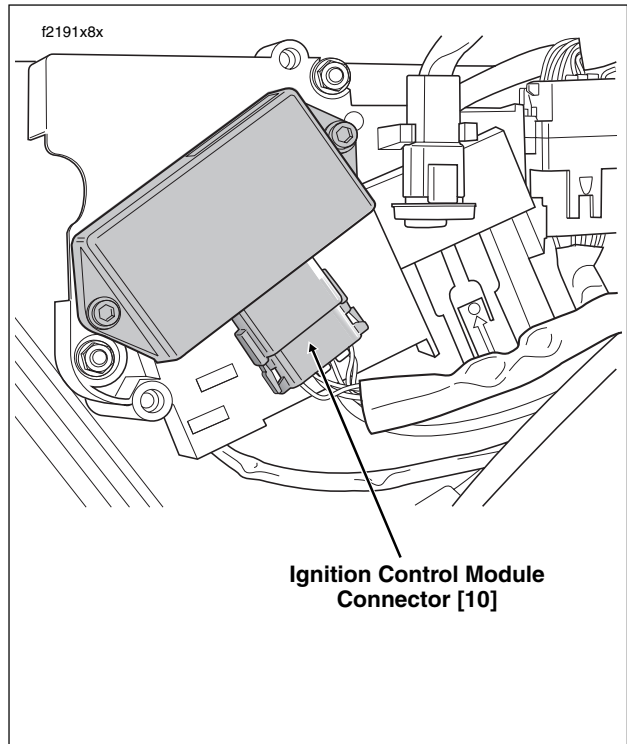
Ignition Control Module - Carbureted Models (Under Right Side Cover)
